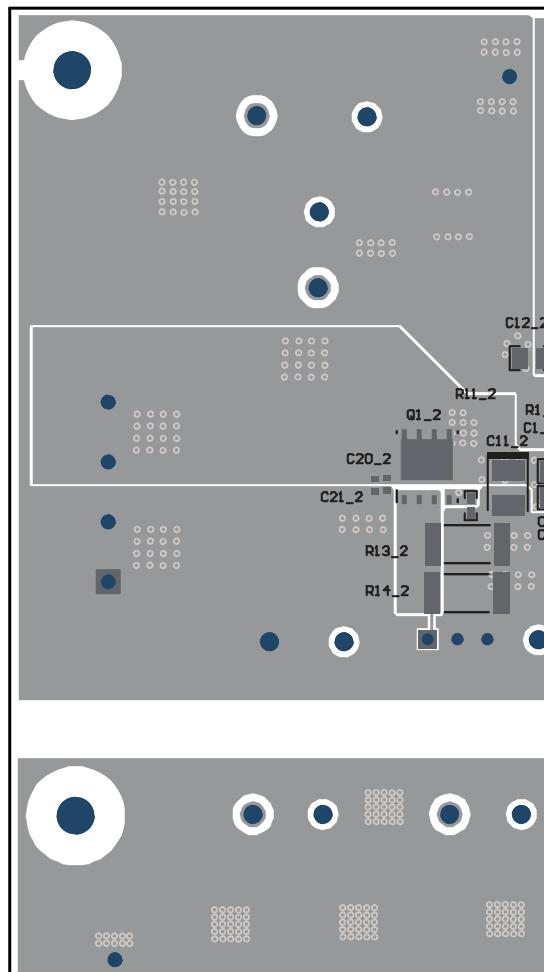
Bottom-Side Composite View (Viewed From Bottom)
